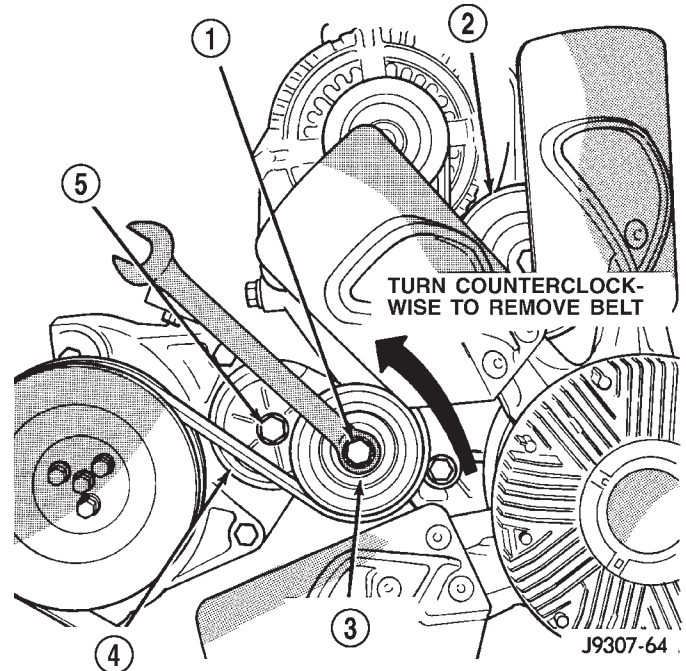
Belt Tensioner - 5.9L HDC-Gas Engine
